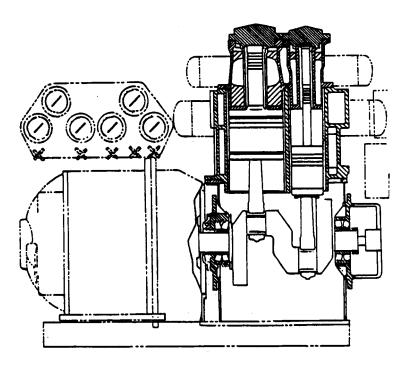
Oil-Lubricated HP Air Compressor Cylinder Arrangement
